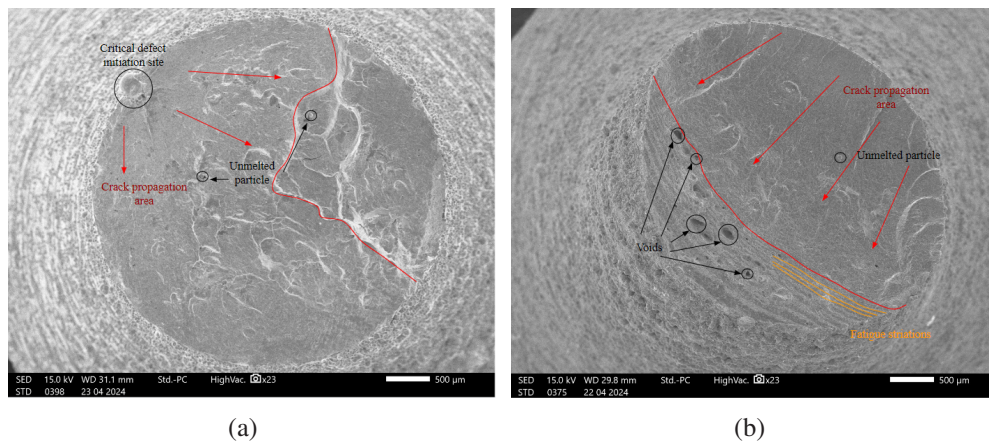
Fracture surface of specimens printed at 65° in: (a) as-built and (b) heat treated conditions with highlighted defects.
